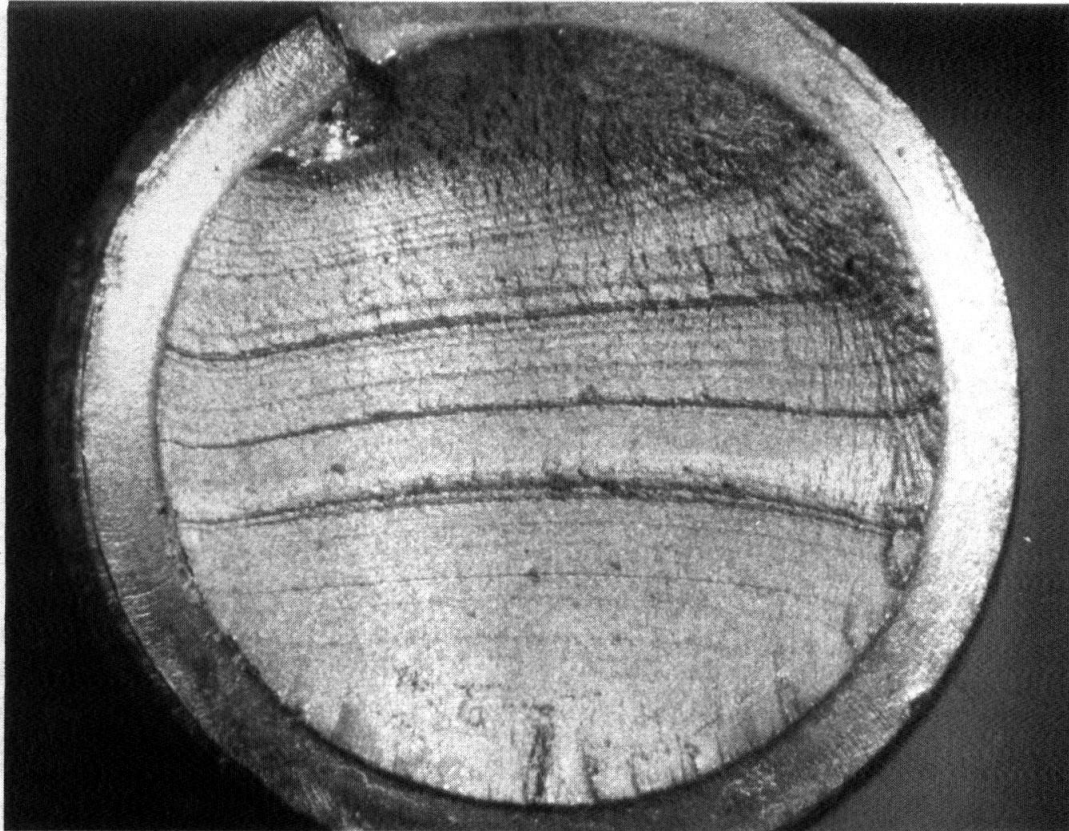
Fracture surface of a 4130 steel bolt viewed by a light microscope with a magnification factor of $16\times$ (striation marks on the fatigue zone can be seen on the surface of the part.)
